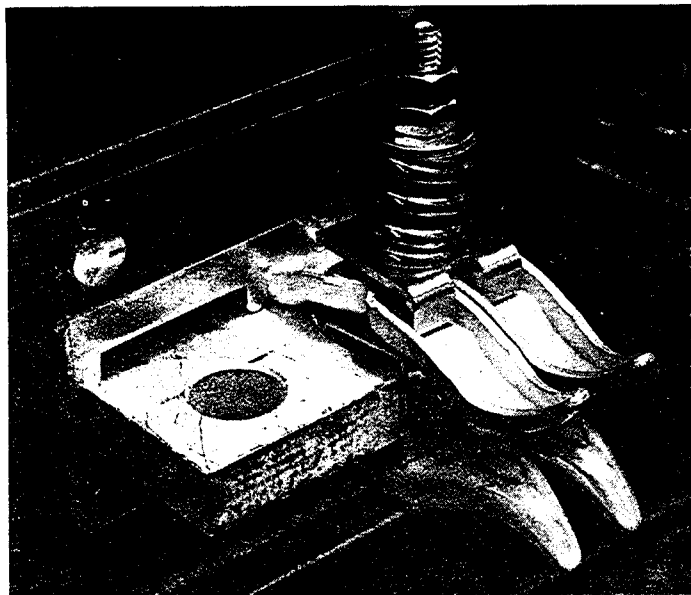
PRIMARY DISCONNECT ASSEMBLY
